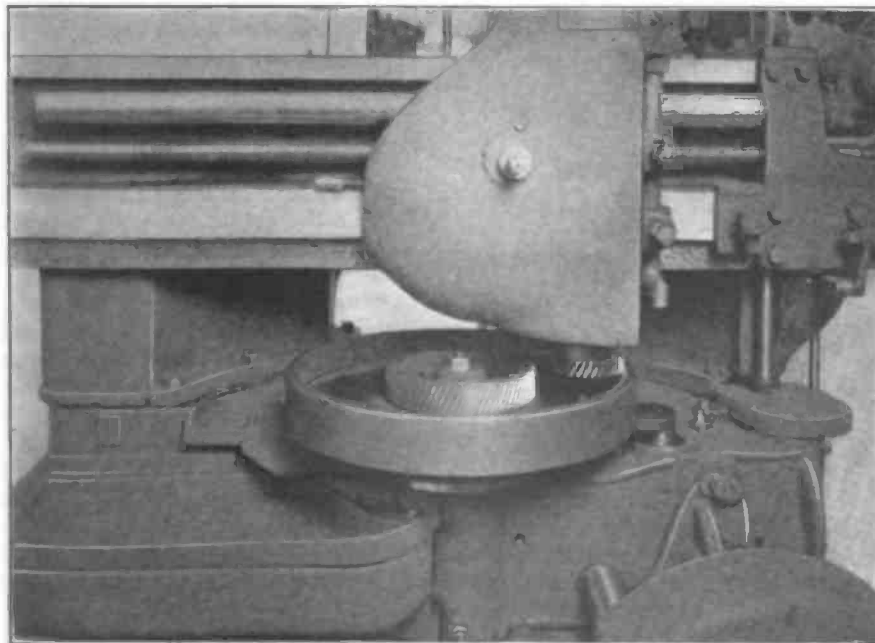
The gear shaper is capable of cutting internal or external helical gear teeth with the same cutter
